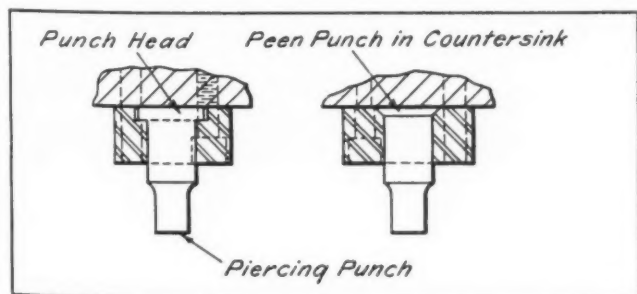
Retainer Type Punch Inserted in a Soft Steel Punch Retainer Plate
